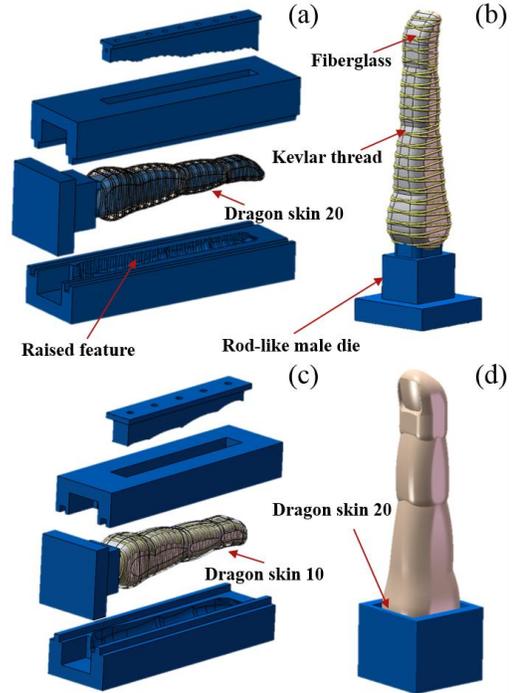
Schematic of the multi-step fabrication process for the fiber-reinforced soft robotic finger. (a) Molding the finger inner bladder. (b) Demolding the finger core while leaving the rod-like male die inside to hold the shape. Gluing the strain limiting layer on the bottom flat surface and wrapping with Kevlar threads. (c) Coating with an outer skin to hold the wrapping in place; (d) Removing the rod-like male die and dipping the finger in uncured silicone elastomeric material to enclose the end of the finger.
